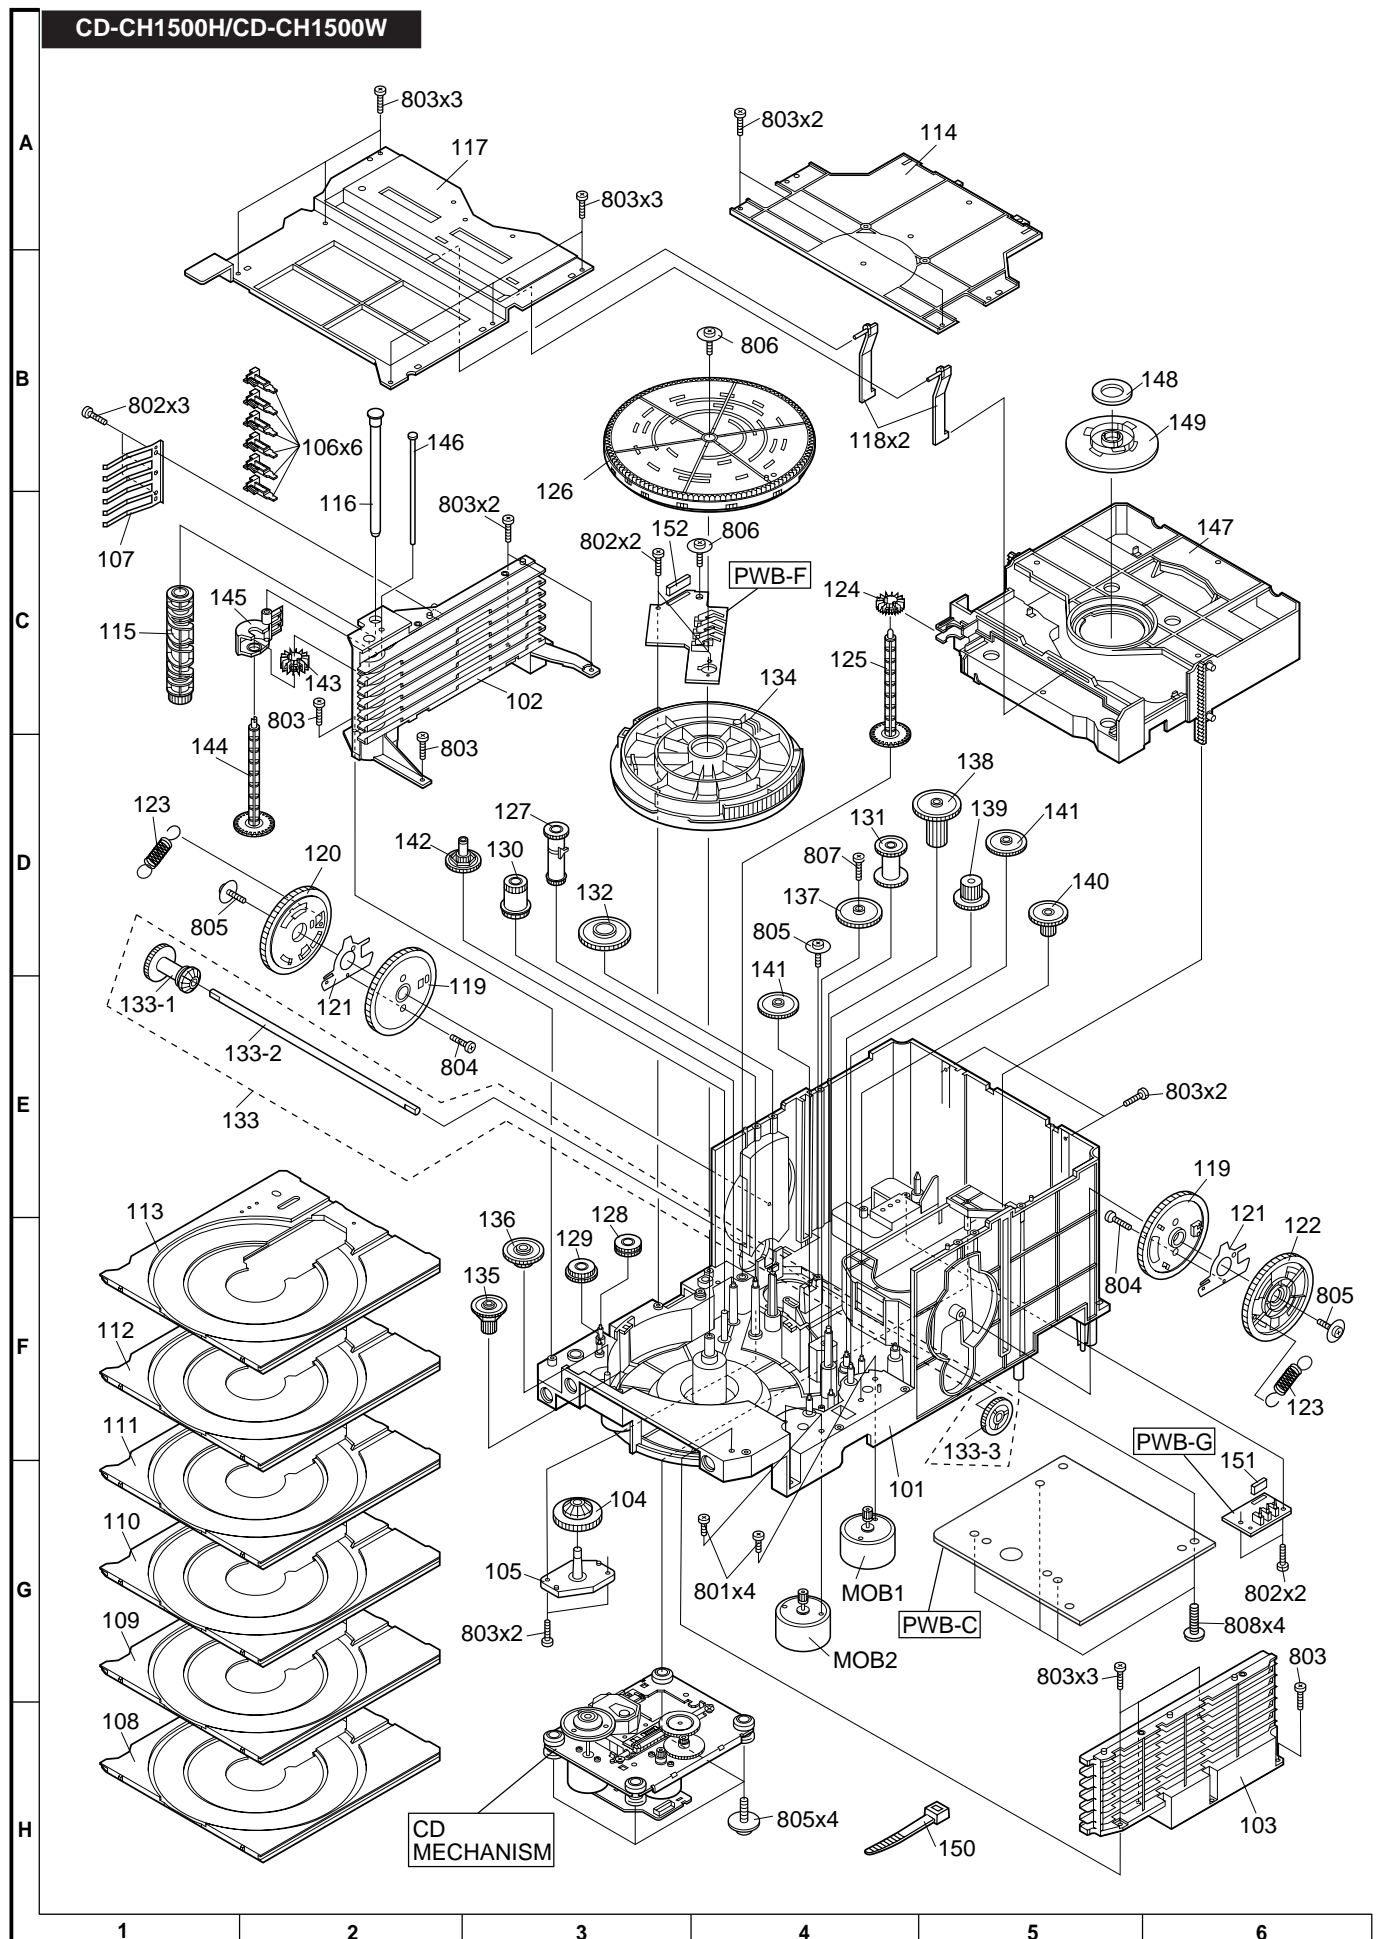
CD CHANGER MECHANISM EXPLODED VIEW
